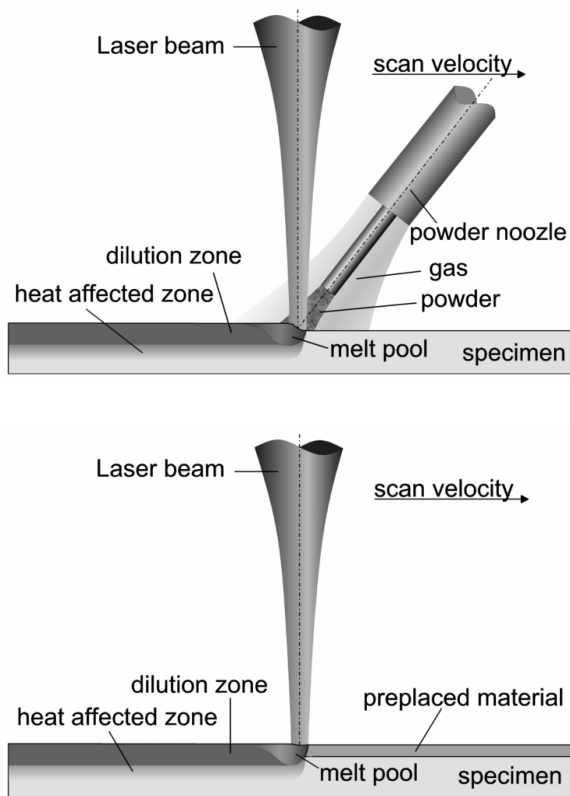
Principle of laser alloying and dispersing. top) single step process, bottom) two step process (BIAS)
